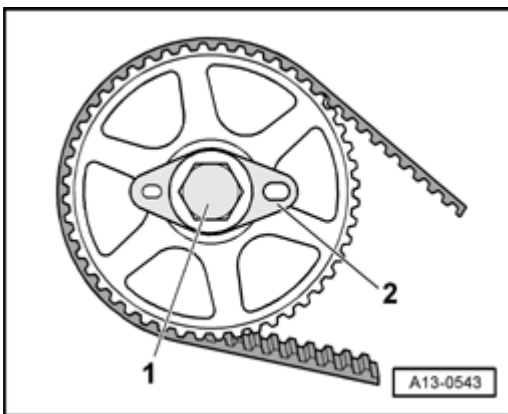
Replacing Bolts For Camshaft Gears And Securing Plates
